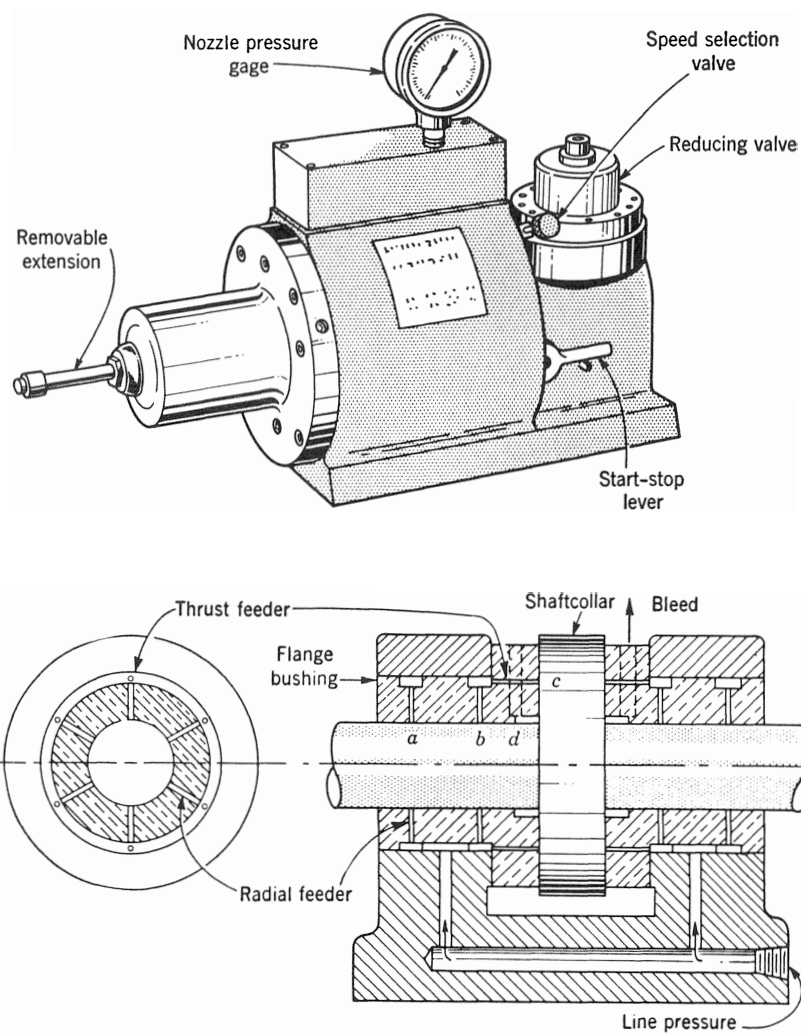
Air Lubricated Grinder and Bearing Arrangement.
